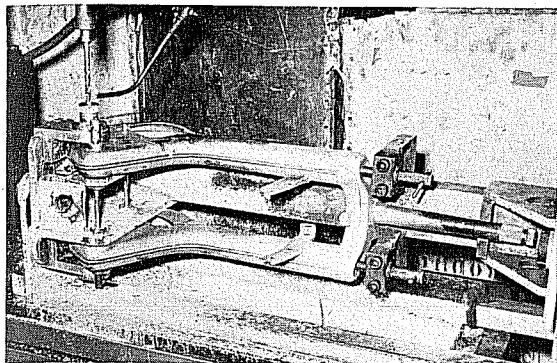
(above).—Drilling projection-welded bosses on fork-legs
